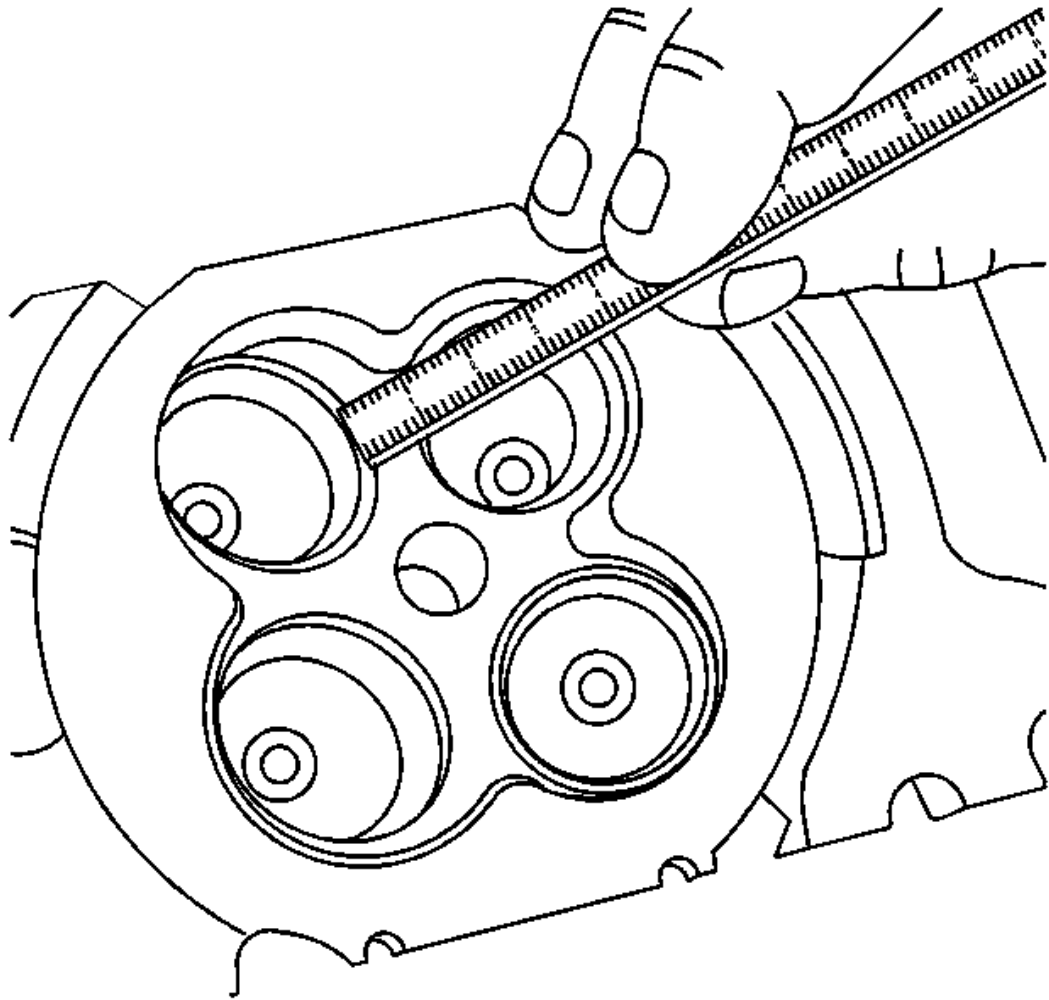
Measuring Valve Seat Width In Cylinder Head
